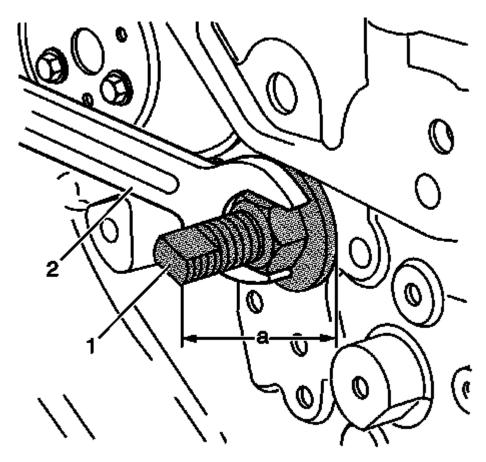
Turning Balancer Shaft Bearing Remover And Installer Tool Courtesy of GENERAL MOTORS COMPANY
